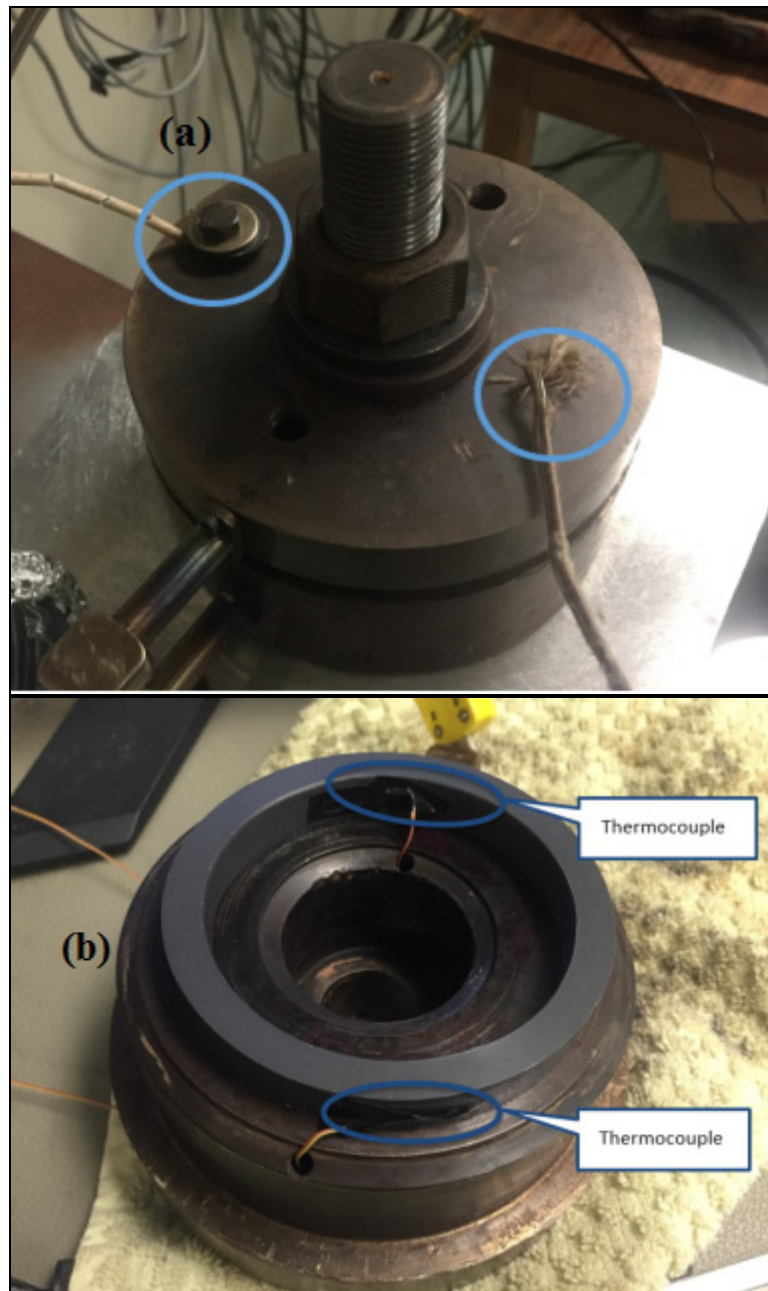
6 (a) external thermocouple (b) internal thermocouple
